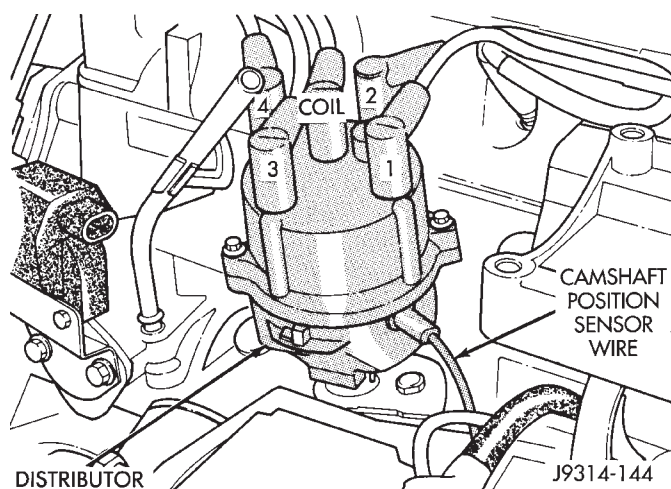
Distributor and Wiring—2.5L Engine—Typical
